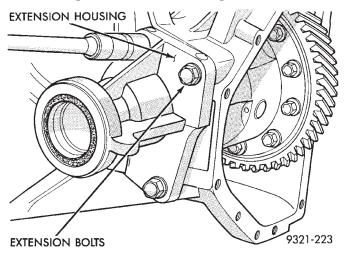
Extension Bolts (Front Wheel Drive Vehicles)
